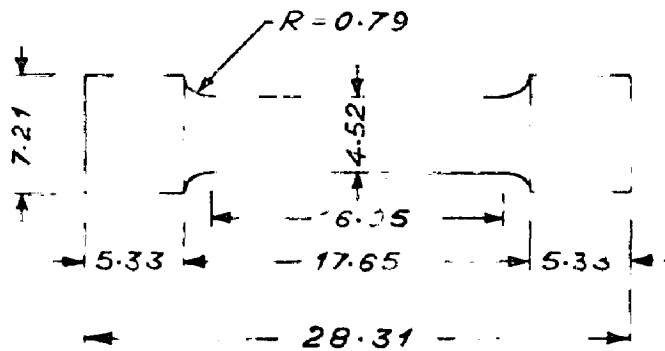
HOUNSFIELD TENSOMETER SPECIMEN.
